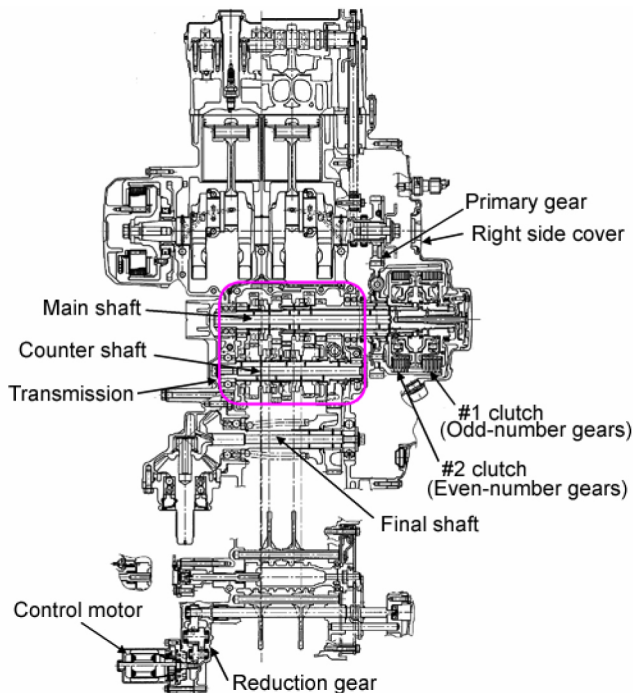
Cross-sectional drawing of engine with Dual Clutch Transmission
